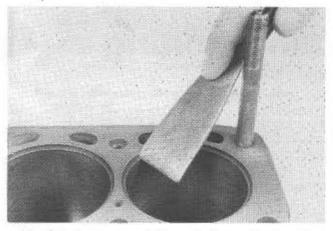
Inspect and Clean Cylinder Bore and Ledge
